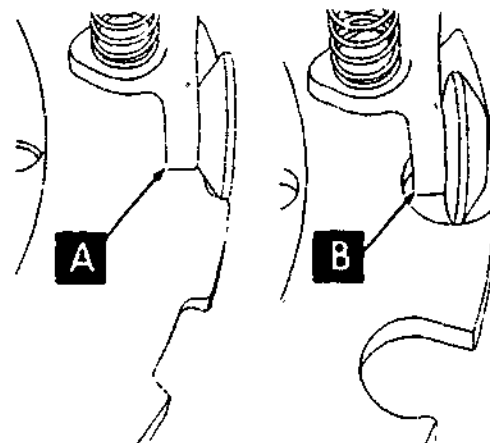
The roller knock-out pawl may be assembled with the roller rim either toward the edge as in A, or toward the center as in B. Set the roller as in B for deep-cell plates.
